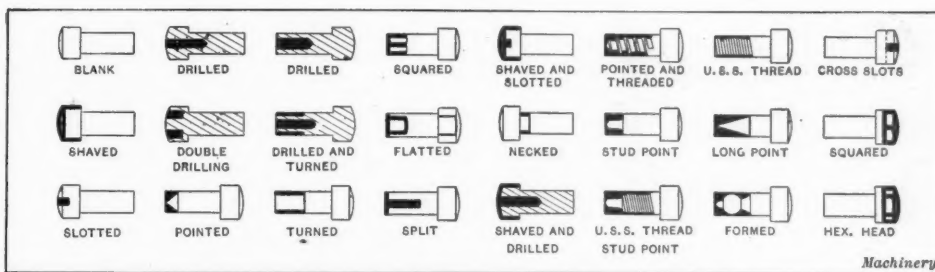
Examples of Work done on Townsend Automatic Screw Machine
